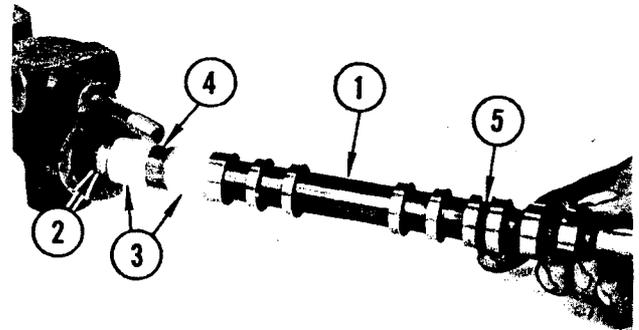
CONTROL VALVE PISTON REMOVAL
